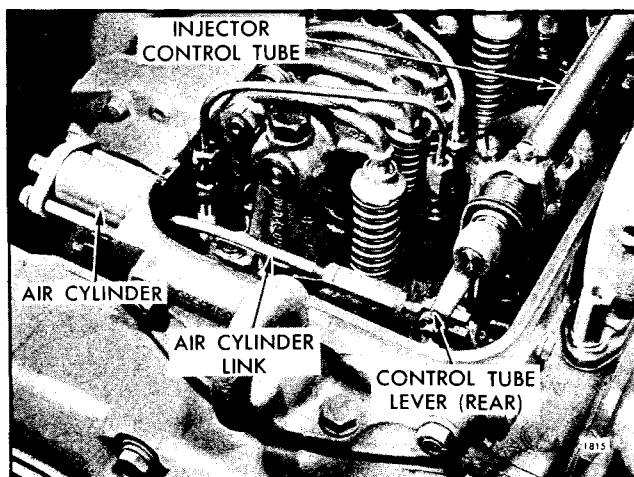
Air Cylinder Used with Fuel Modulating Governor
